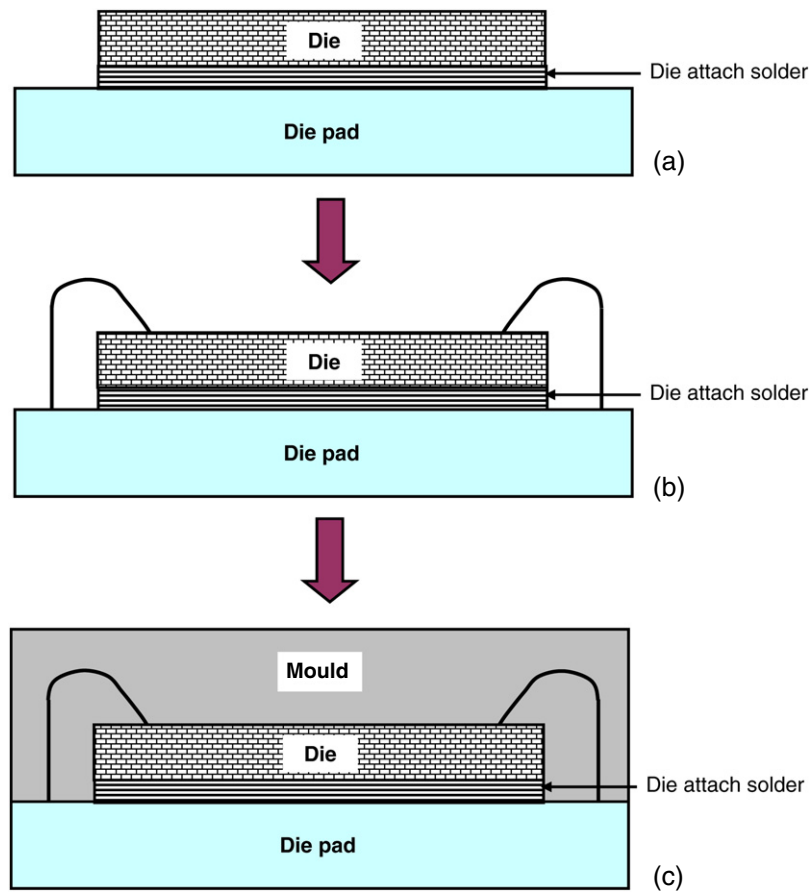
Wire bond packaging: (a) die attachment, (b) wire bonding and (c) moulding.
